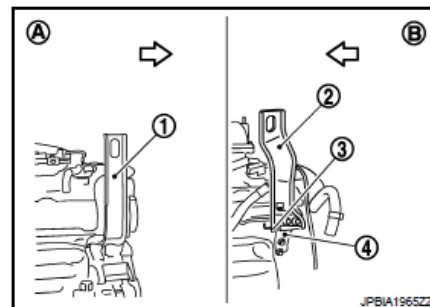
Identifying Engine Slingers Into Front Of Cylinder Head (Bank 1) And Rear Of Cylinder Head (Bank 2)
